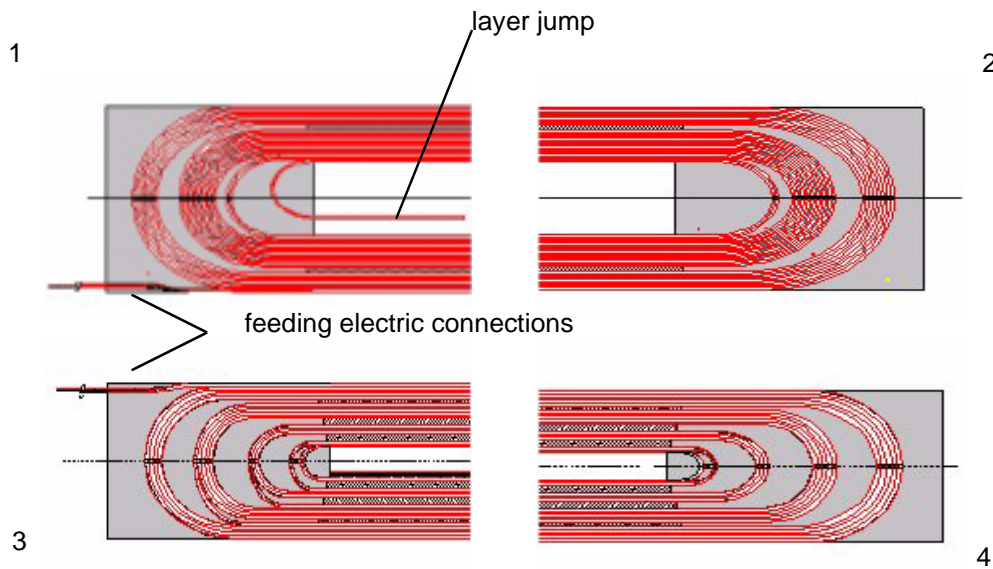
Developed longitudinal section of the inner and outer layers in the coil heads: 1 - outer layer in non connection side head (NCSH); 2 - outer layer in connection side head (CSH); 3 - inner layer NCSH; 4 - inner layer CSH
